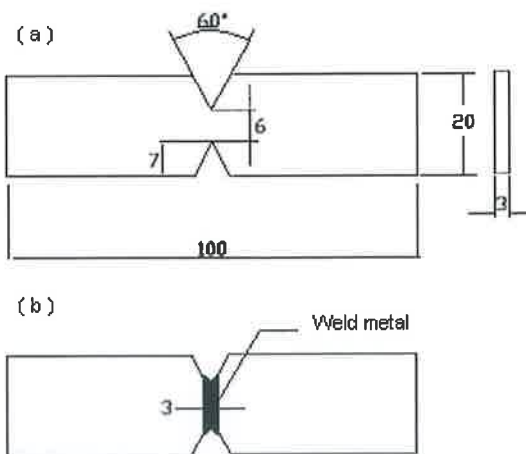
Schematic diagrams showing the dimensions of notched tensile specimens for (a) the steel plate (b) the laser weld, dimensions in mm [168].
